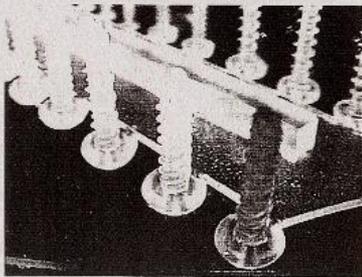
Concept SME-SMP Screw in a Product Assembly.
